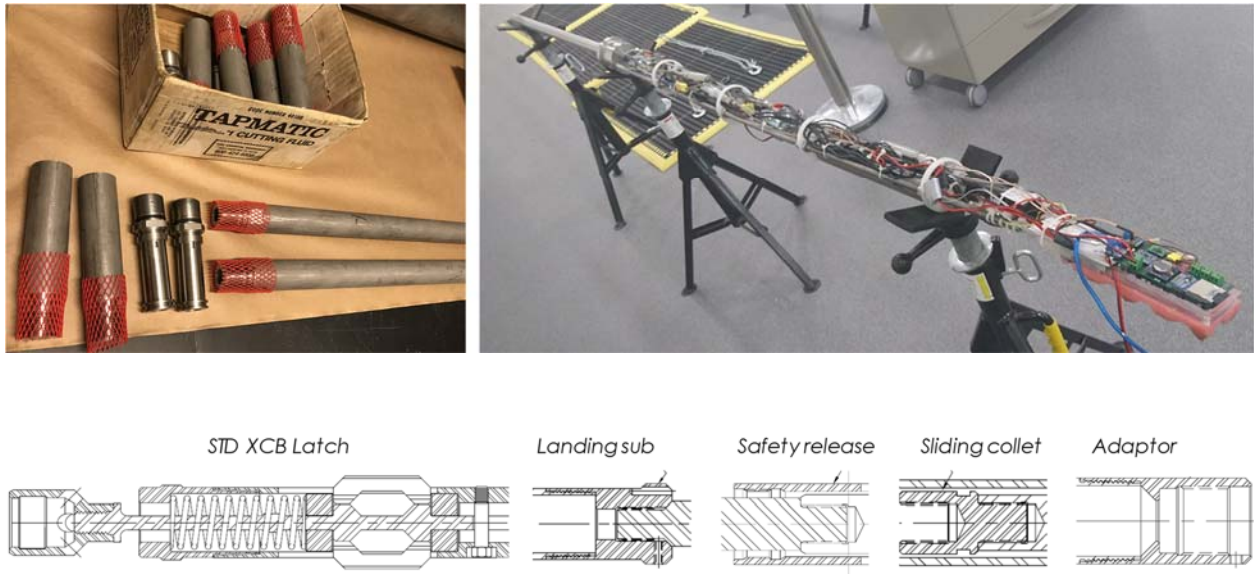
(Upper images) Major parts and assembly of the tool. (Lower images) Key components of a CDS-type coupler with PCTB BHA.
